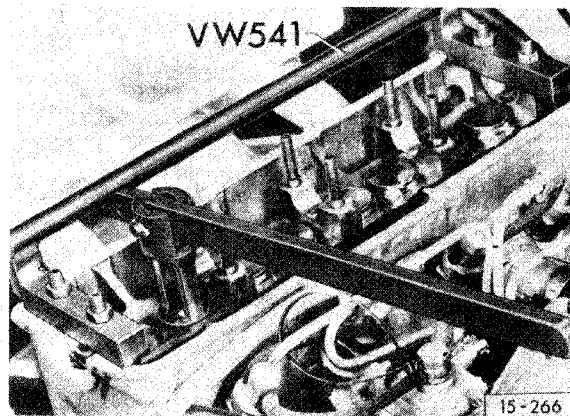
Valve stem seal, removing (with cylinder head installed)
